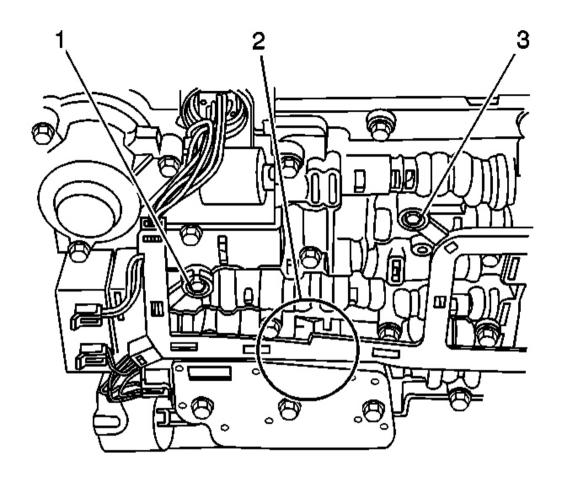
Placing Tab Between The Valve Body And The Pressure Switch Courtesy of GENERAL MOTORS CORP.
